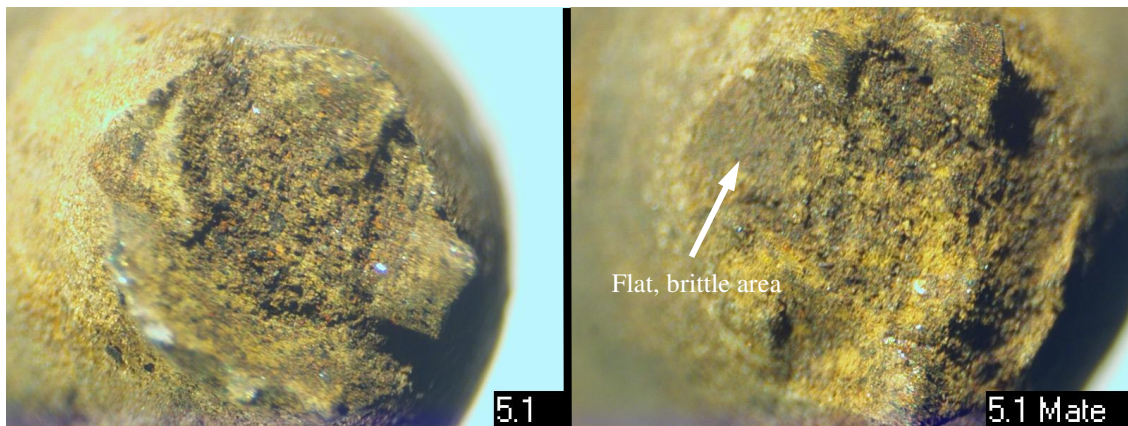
Visual inspection of test specimen 5 – fracture surfaces.
